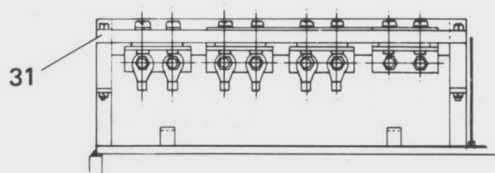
SC2 - 3 TWO BEARING MACHINE (INBOARD EXCITER)
